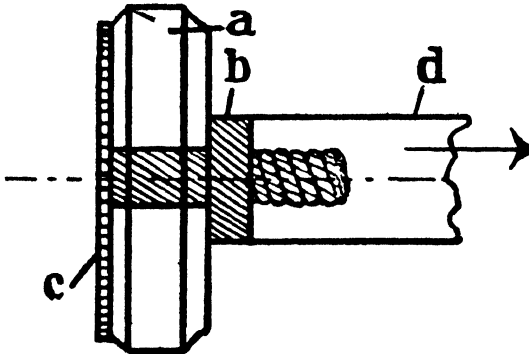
Enlarged Detail of Part of Fig. 136.
